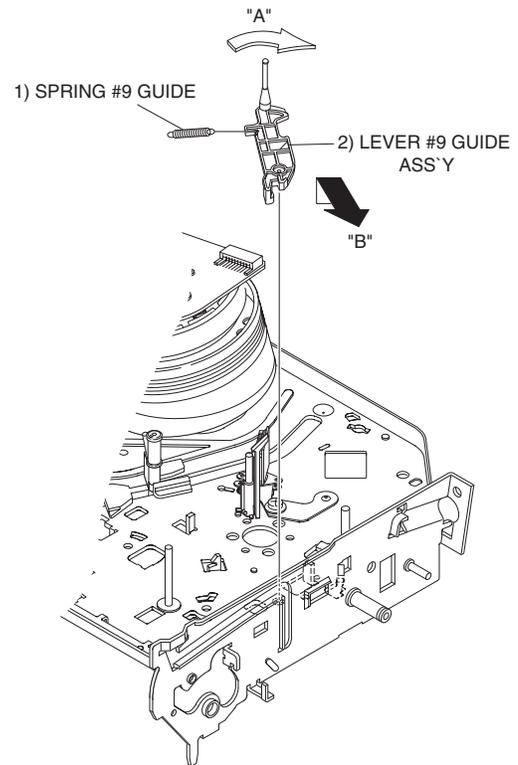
Lever #9 Guide Ass'y Removal
